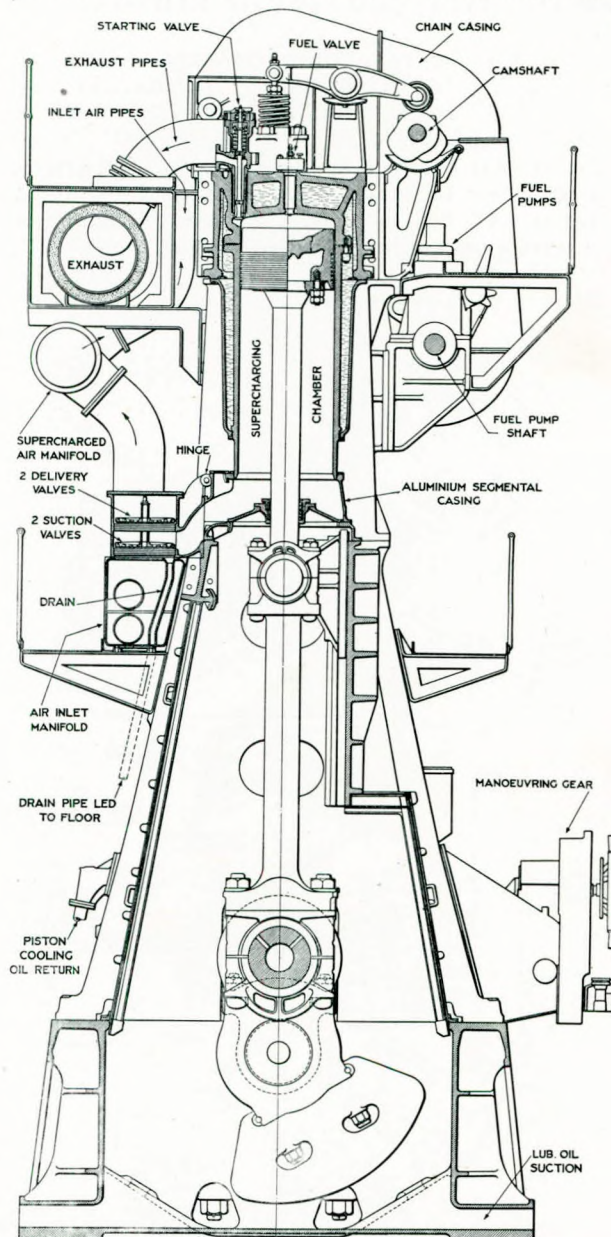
Section of single-acting four-cycle supercharged engine.
